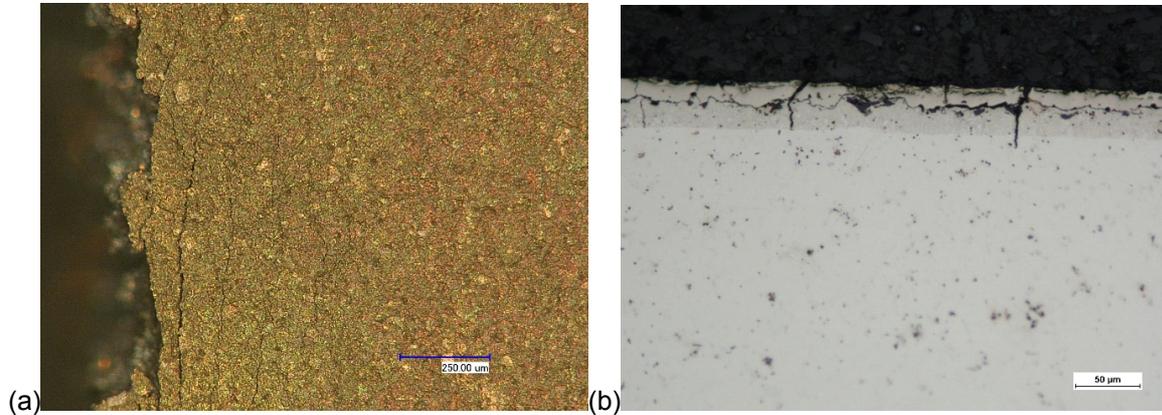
A macro image of the side surface of the fatigue scrap, with visible cracks (a) and longitudinal fatigue scrap with the cracks in the aluminide layer (b)
